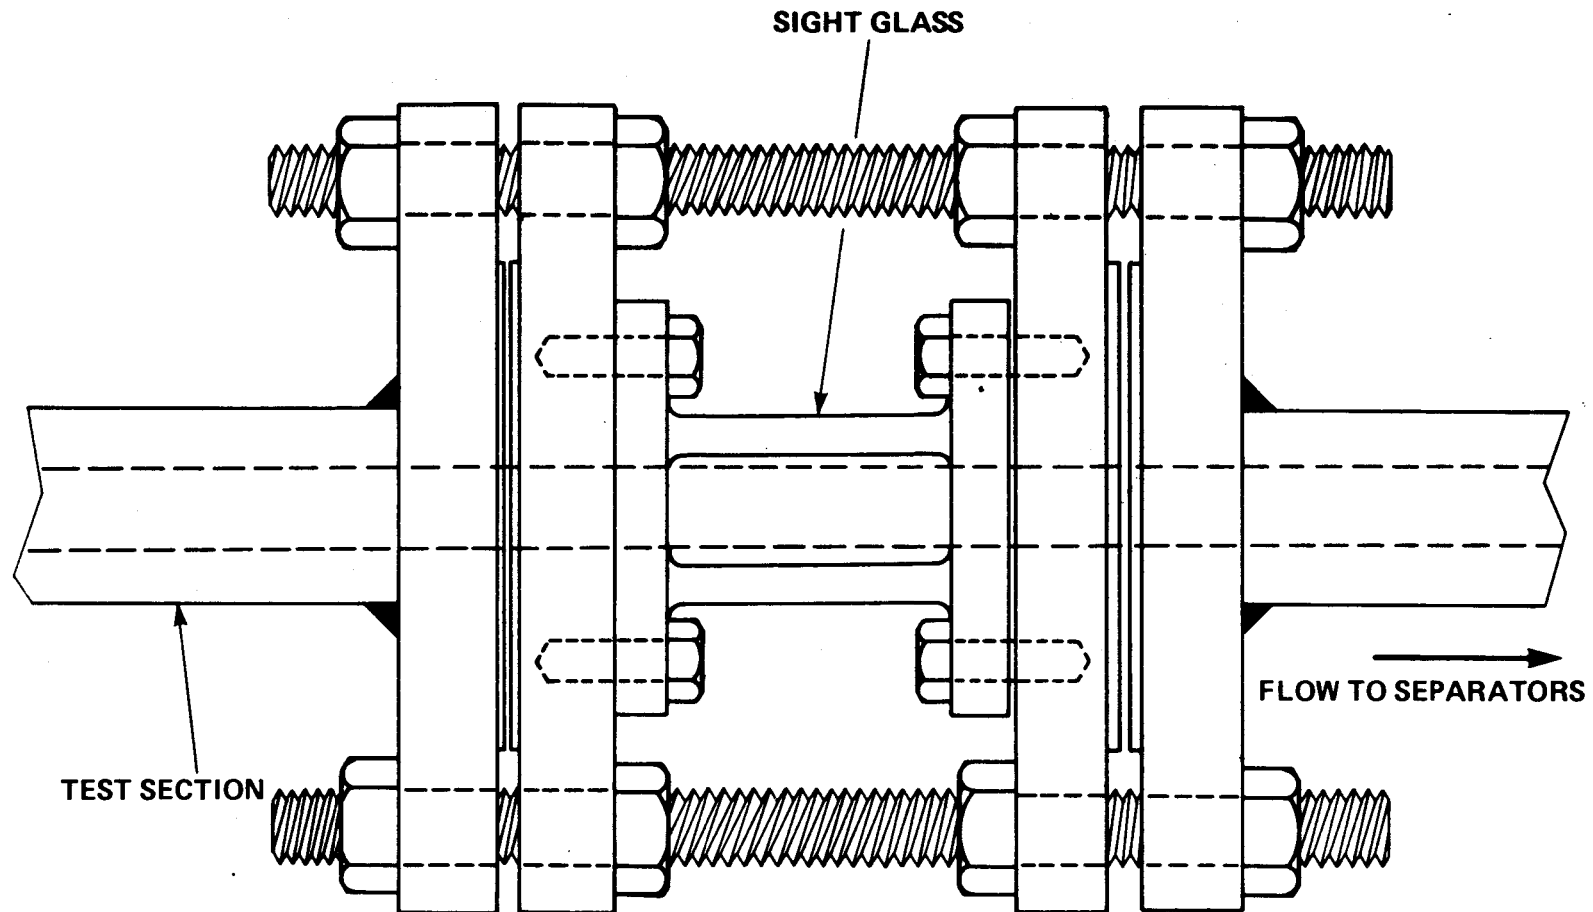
VISUAL FLOW INDICATOR ASSEMBLY.
